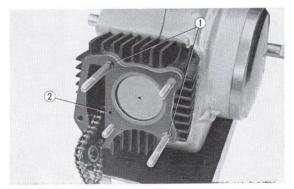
① Hollow dowel pin ② Cylinder head gasket
